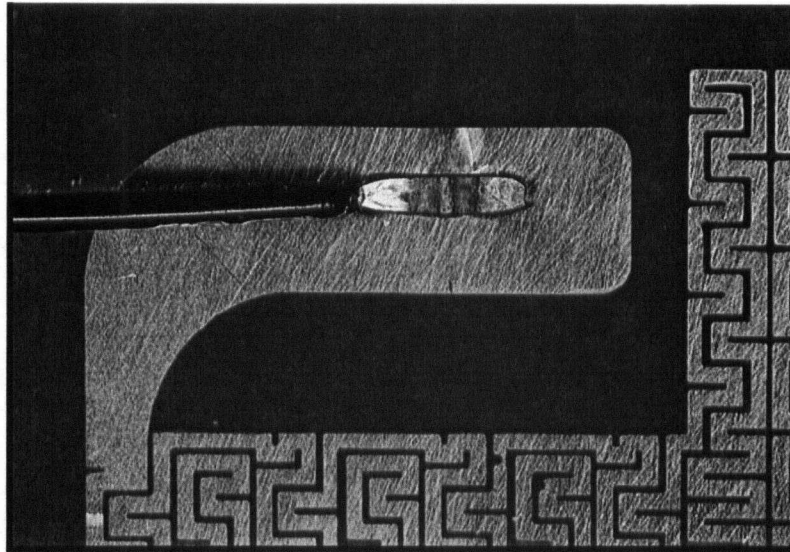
Spot welding the pre-flattened copper wire to nickel heating element using 250DP and 88A/EZ weld head.
